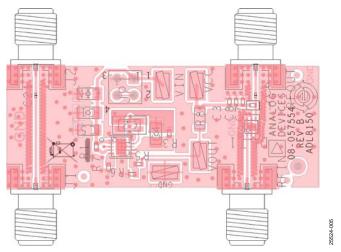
ADL8150-EVALZ Assembly Drawing (J1 and J2 are Not Installed)
